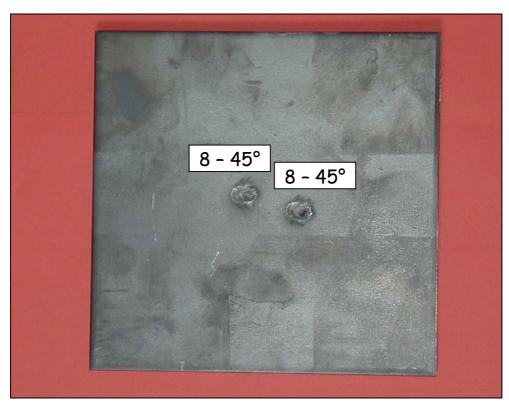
Steel plate 8 mm, material 11373-75, side of shoot out
